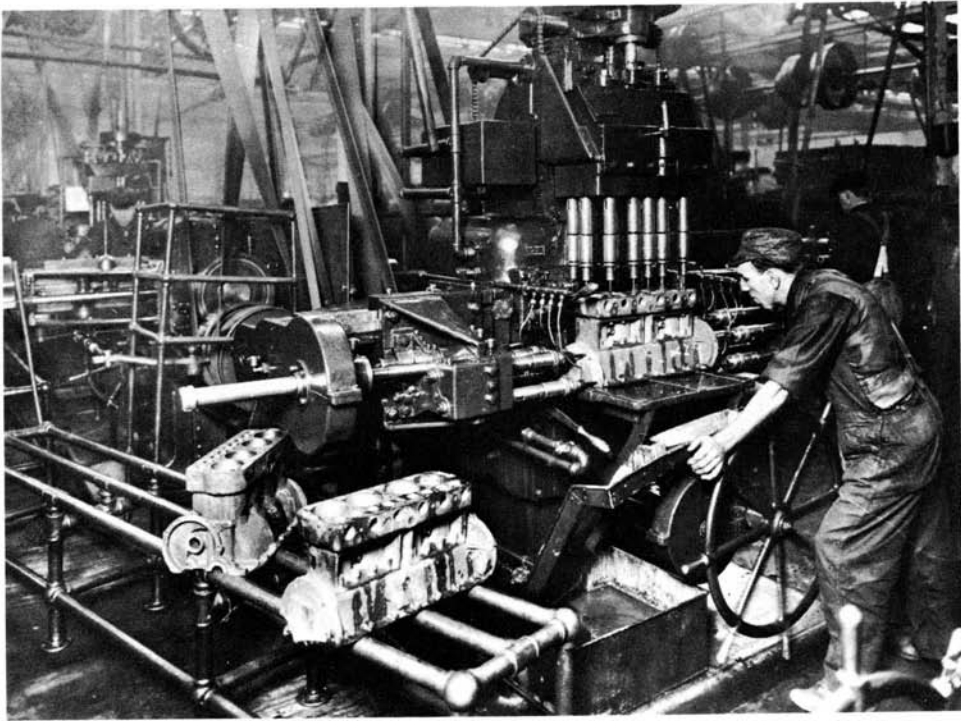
Drilling and Reaming Engine Block, 1913. This is one example of multiple spindle drilling and reaming machinery designed to machine the Model T engine block. (Henry Ford Museum, The Edison Institute, Neg. No. 833-219.)
